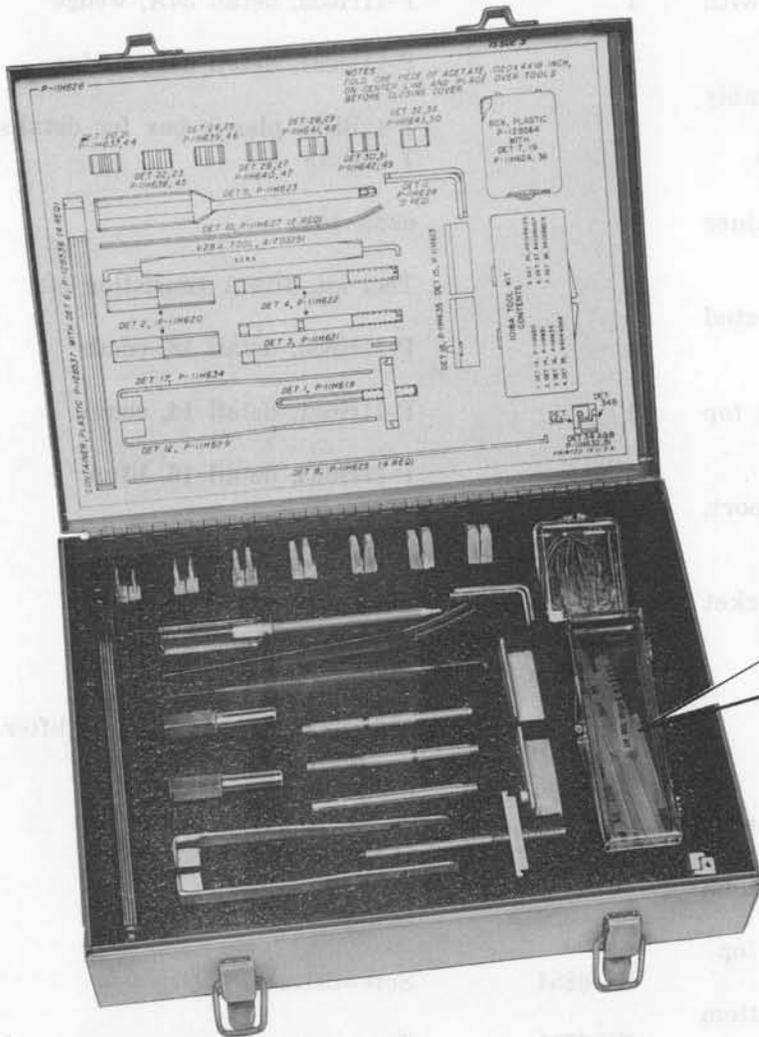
1017A Tool Kit Including 1018A Tool Kit
